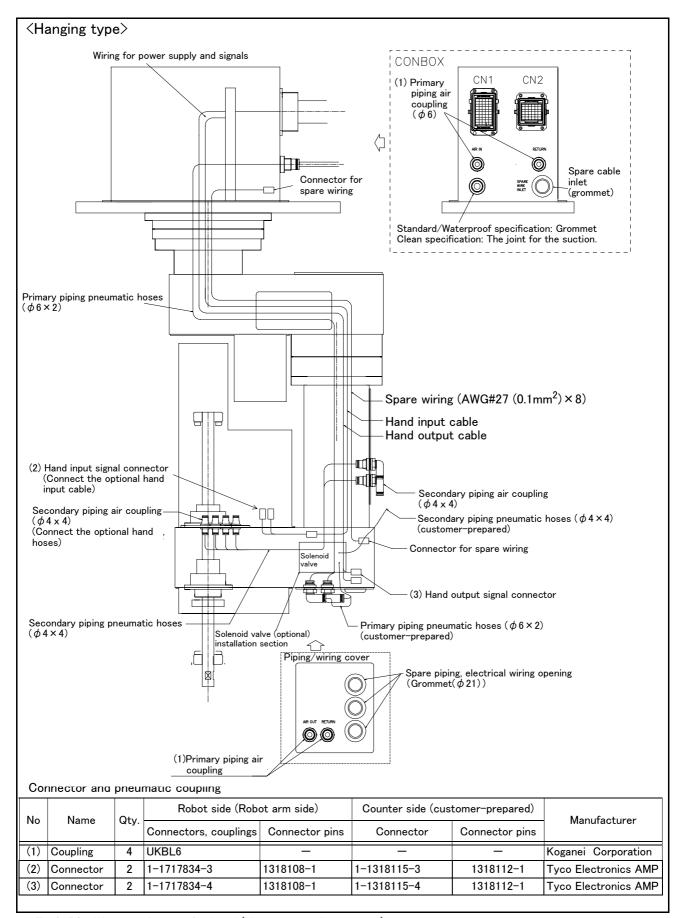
Wiring and piping for hand (Hanging installation type)
